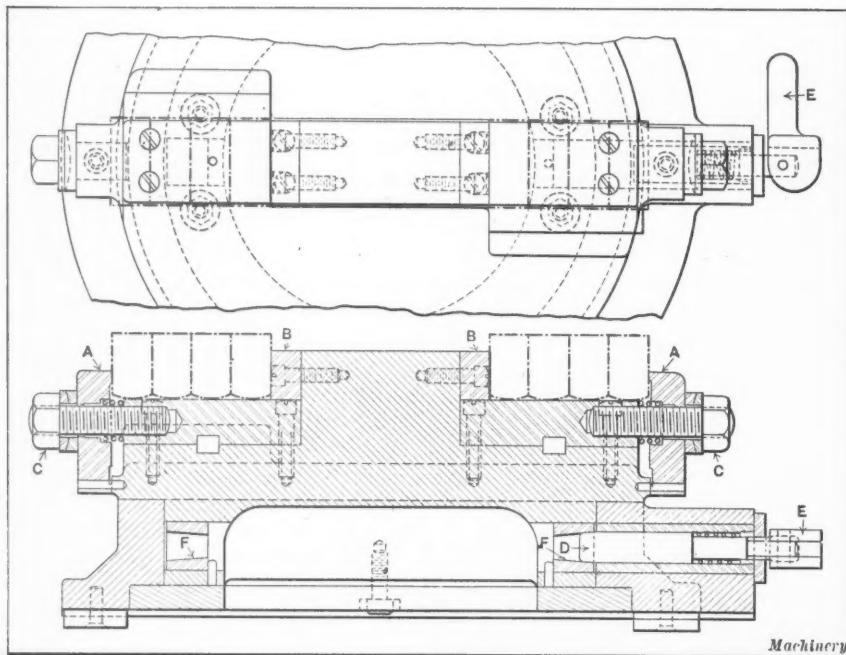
Sectional and Partial Plan Views of the Milling Fixture illustrated in Fig. 12
